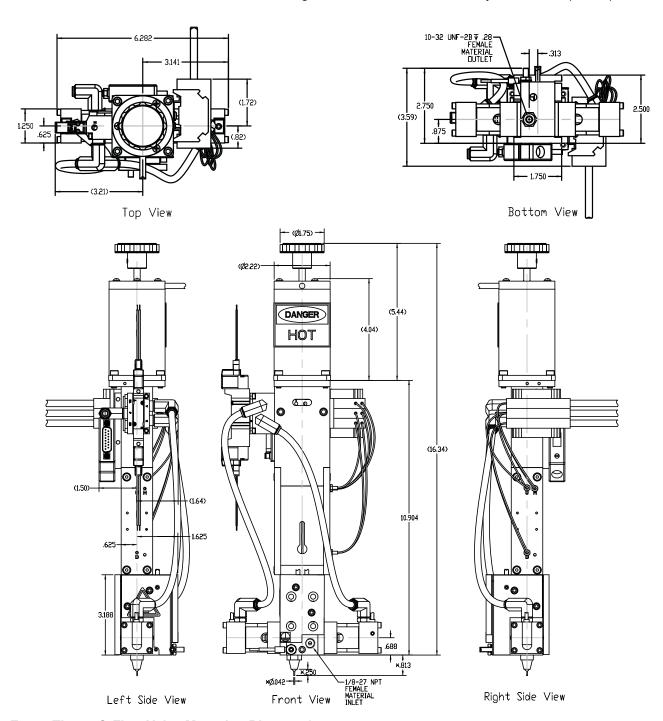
Therm-O-Flow Valve Mounting Diagram 1
